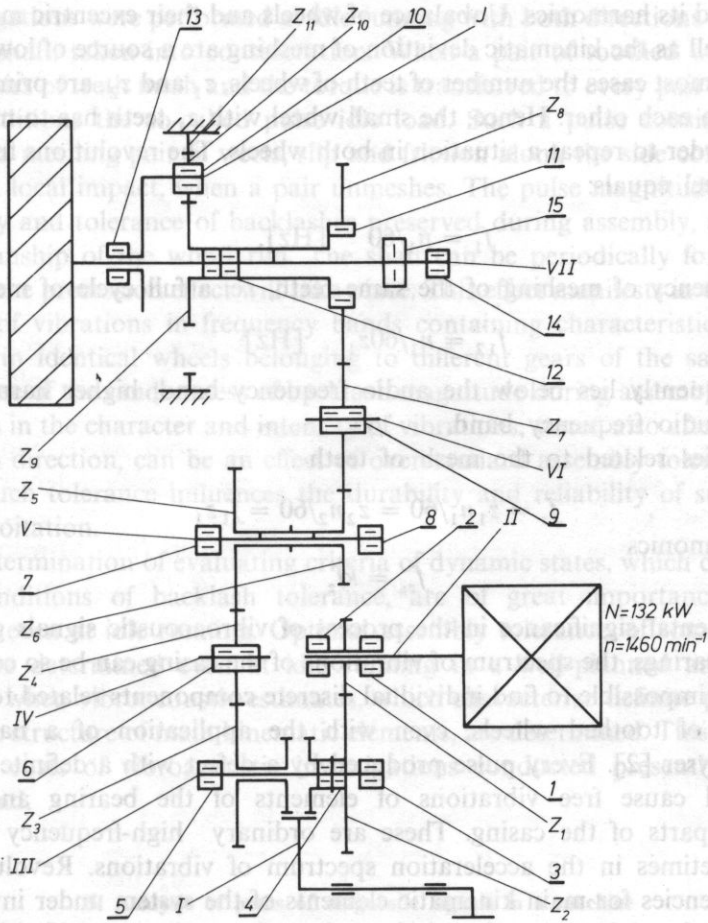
Kinematic diagram of a head with a specification of shafts (I–VII), toothed wheels ($Z_1 - Z_{11}$) and bearings (1–15)
